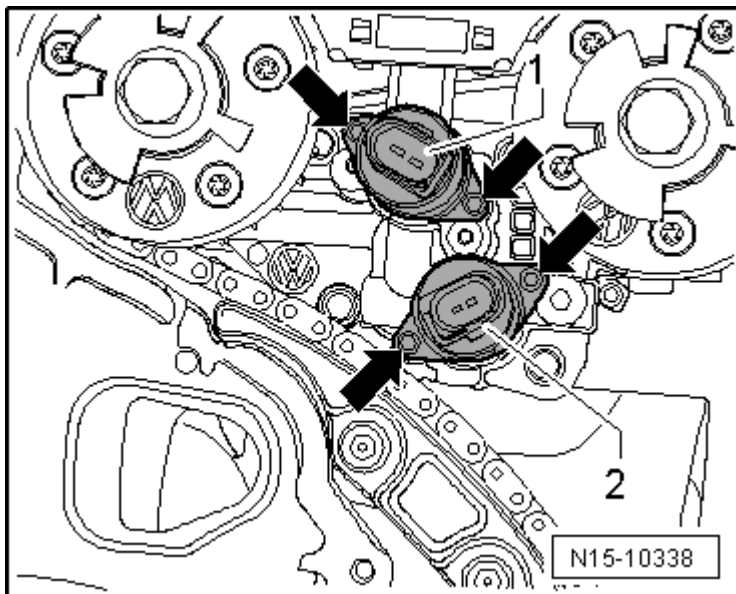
Identifying Camshaft Adjustment Valve Securing Bolts
